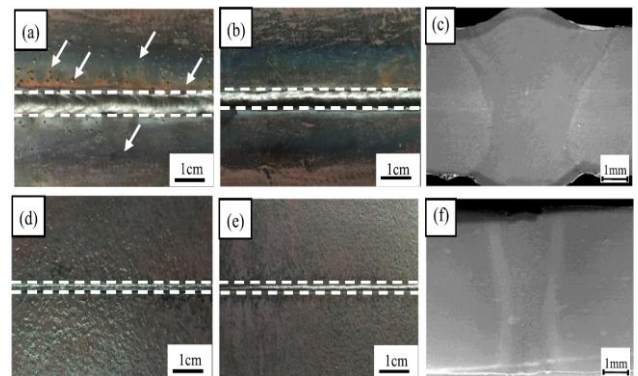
Surface morphologies (a) the top surface of GMAW, (b) the bottom surface of GMAW, (c) cross section morphology of GMAW, (d) the top surface of LBW, (e) the bottom surface of LBW, (f) cross-section morphology of LBW [5]
